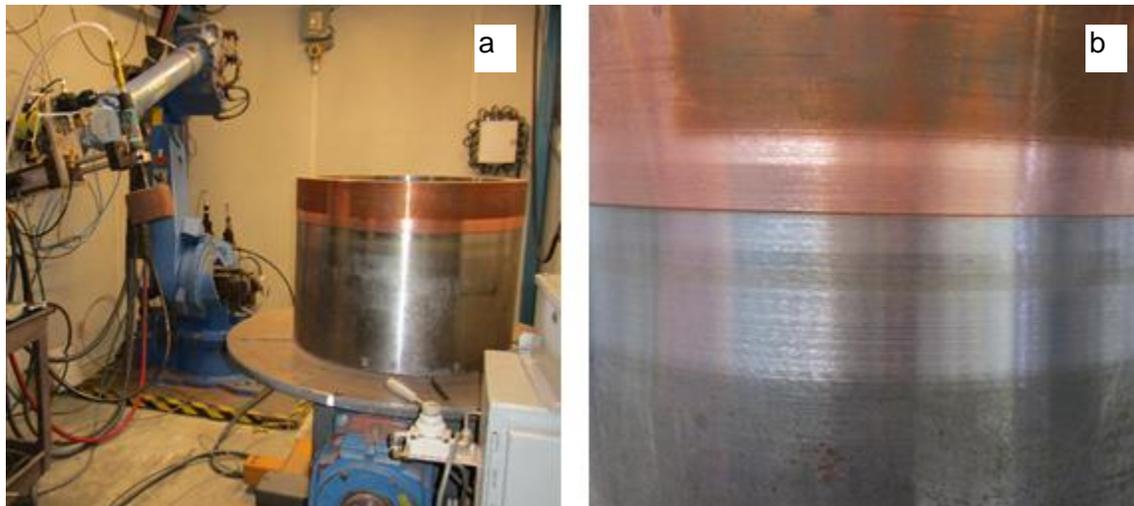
Cold Spray of the UFC's – Grit Blasting to Remove Scale (a) and the Application of Cold Spray Copper to the Closure Weld Zone (b)
